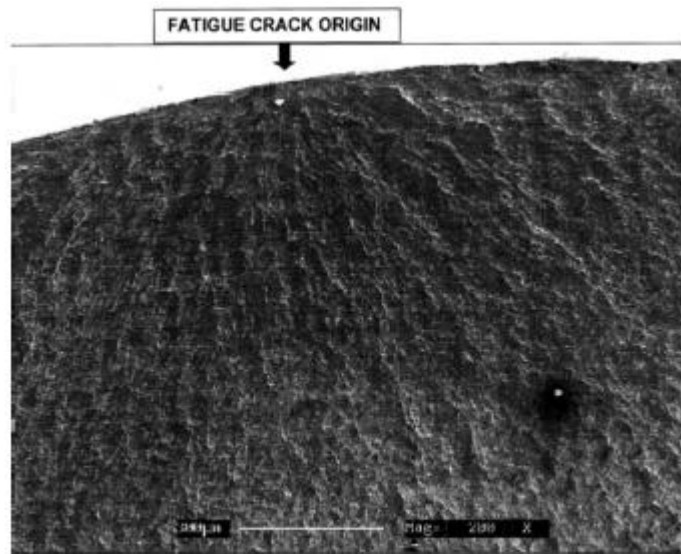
Typical fracture surface from base metal. Rotating bending fatigue test.
